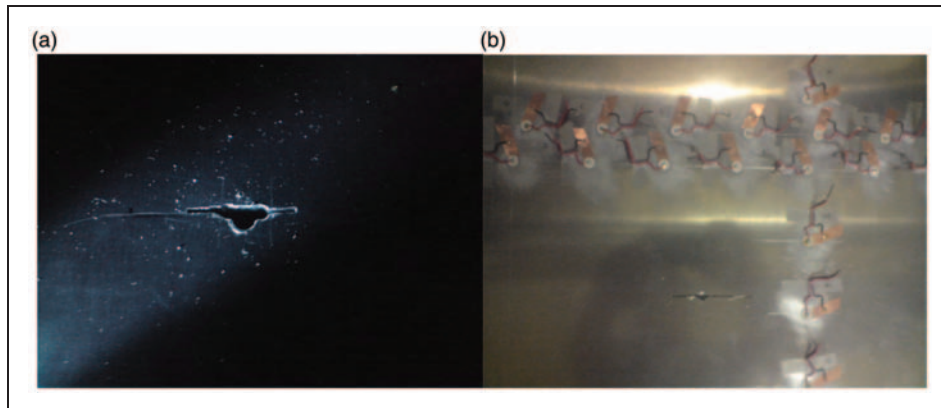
Damage manufactured to the plate: (a) 16 mm damage centered at $(-90, -110)$ mm and (b) 50 mm machined crack.
